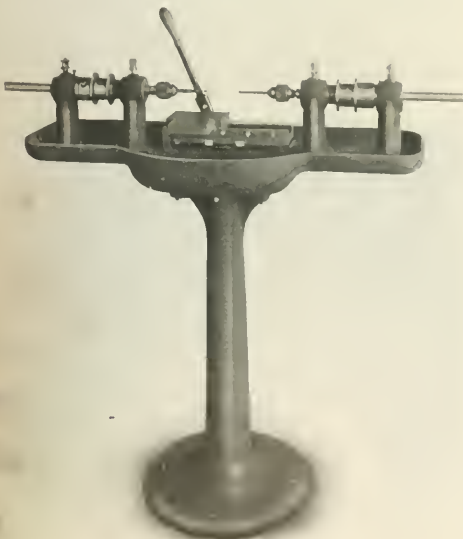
National-Acme Style D Double-spindle Drilling Machine
